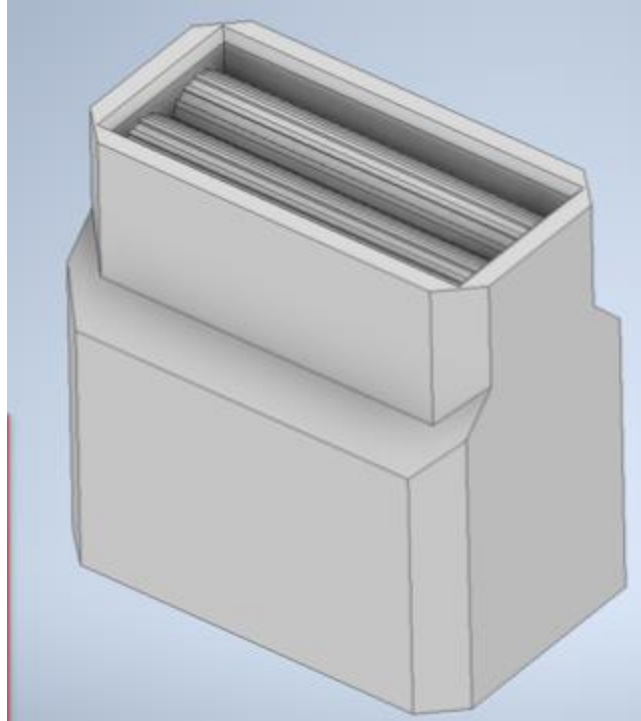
Mechanical Sketch - Grinder rendering. Isometric view.
